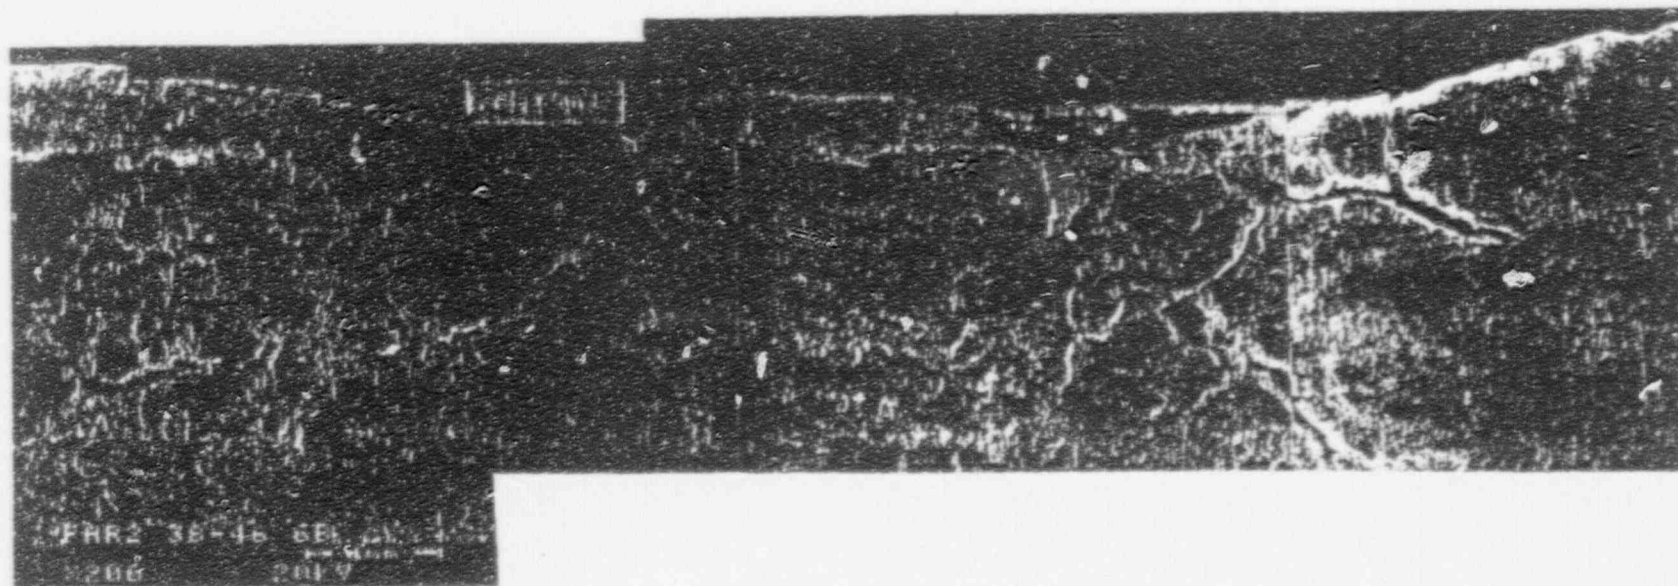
Appearance of the OD surface at burst opening in Tube R38-C46.
